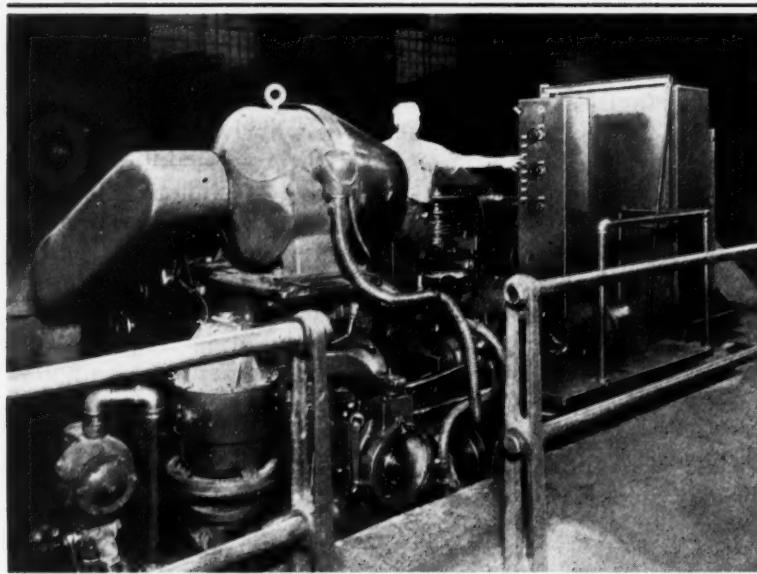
The Operator of This Landis Roll Grinder Rides on the Carriage, which is Equipped with a Master Control Station for Controlling the Entire Machine
